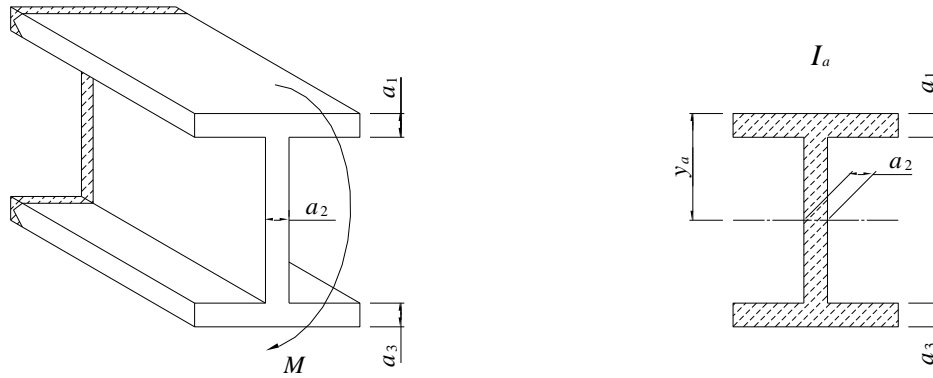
Full Penetration Groove Welded Joint Subjected to Bending Moment
